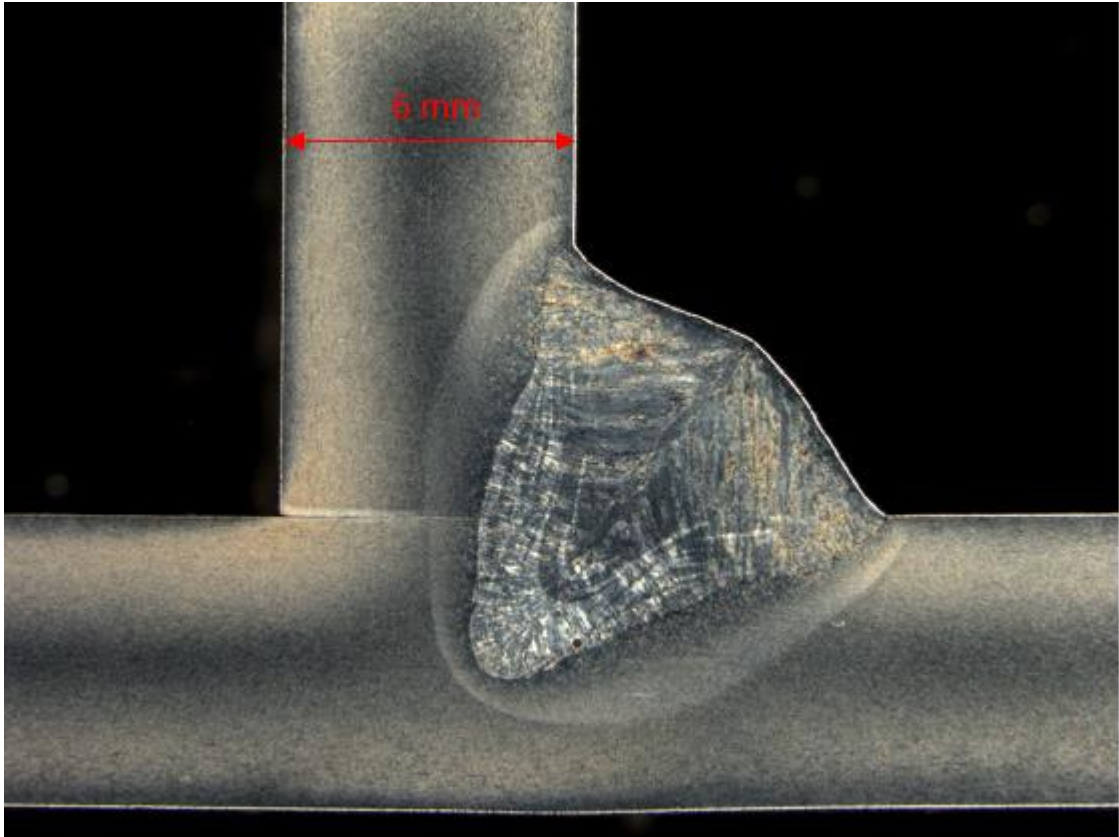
Macro image of MIG/MAG with WiseFusion weld bead.
